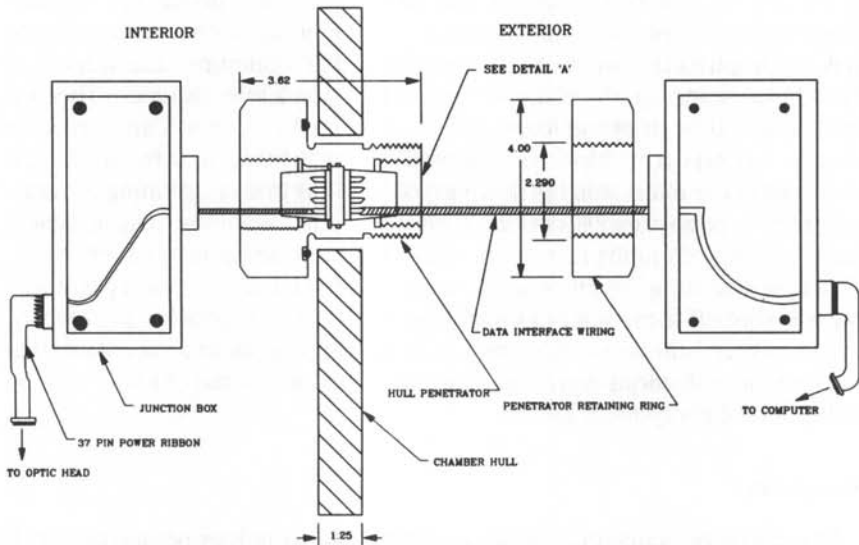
Hull penetrator. Modified brass hull penetrator with insulated ceramic insert for communication between optic head inside chamber and PC outside chamber. Cross section of chamber hull with modified penetrator, interface wiring, and power junction boxes. Data from ocular head are transmitted through penetrator to a PC on the exterior of the chamber.
